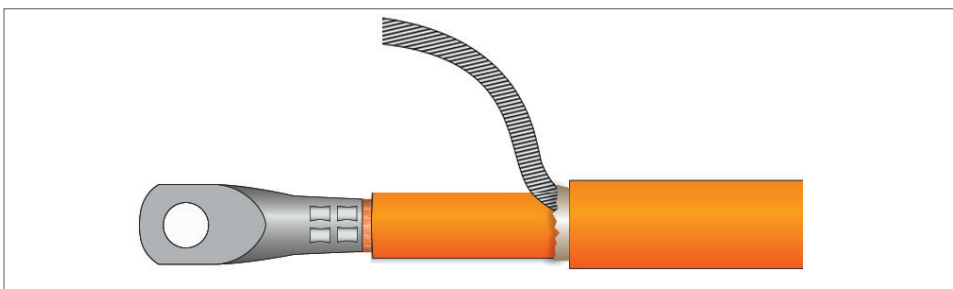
Step 4: Attaching the ring terminal to the inner conductor and crimp it.
